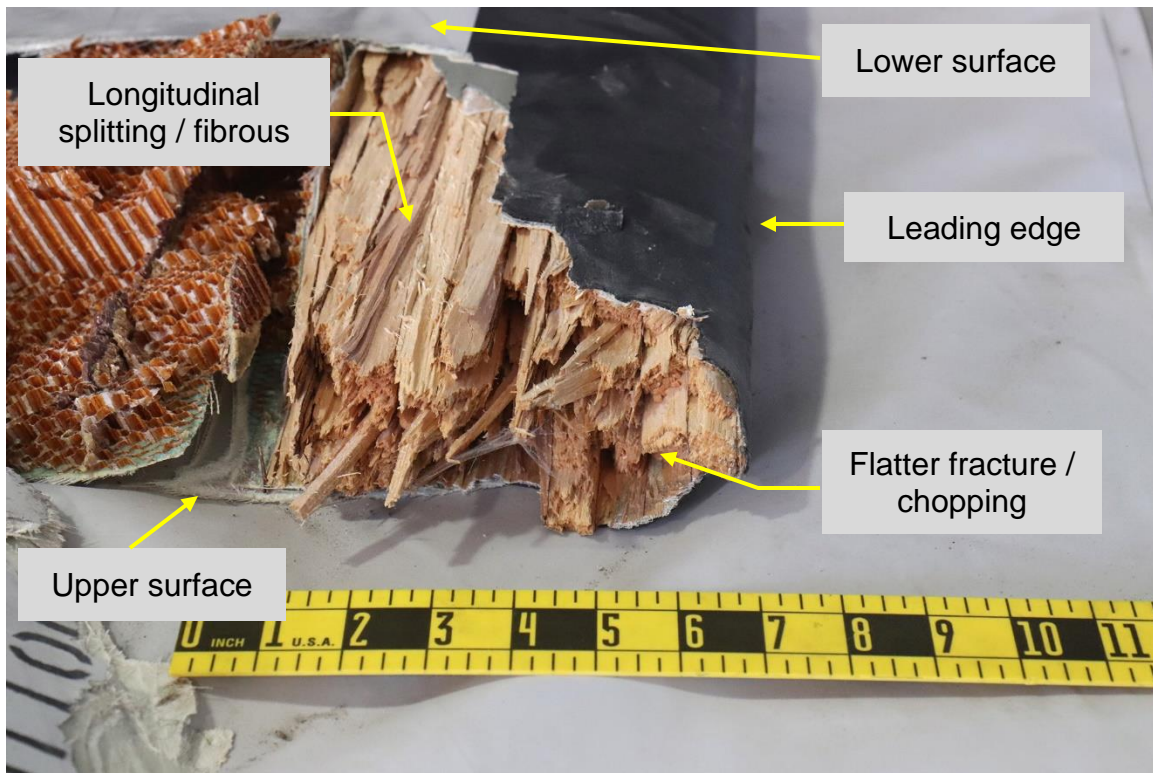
Image of the outboard side of the LHR blade spar fracture.
